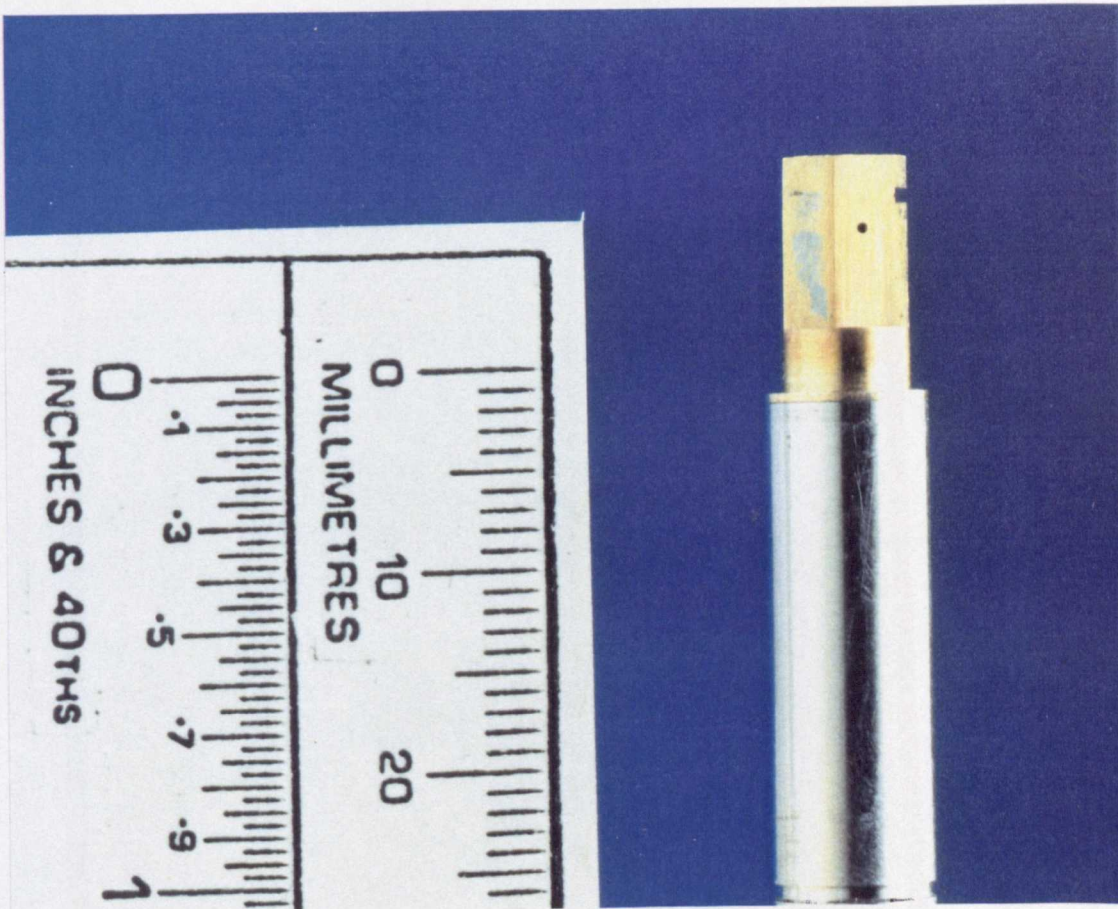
Re-Designed Wedge Probe Partially Retracted into Guide Tube
